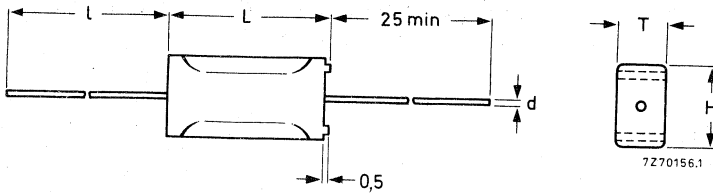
For dimensions T, L, H, d and i, see tables below.
